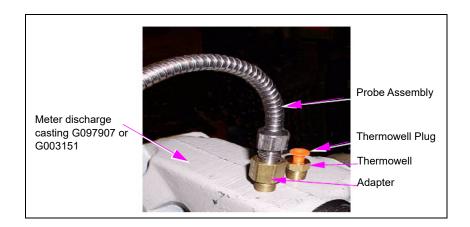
Meter Discharge Casting (Probe Assembly Mounting Location [9850K])
